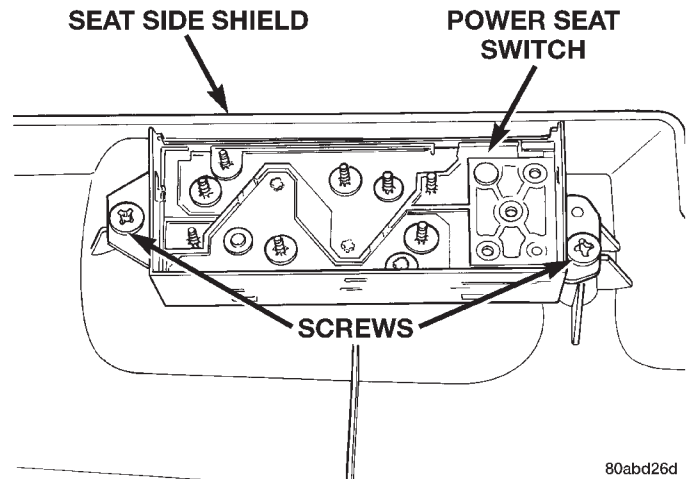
Six-Way Power Seat Switches Remove/ Install
